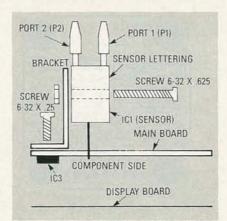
PLACE THE SENSOR BRACKET on the back side of the main board and align the holes on the two tabs with the board mounting holes.
